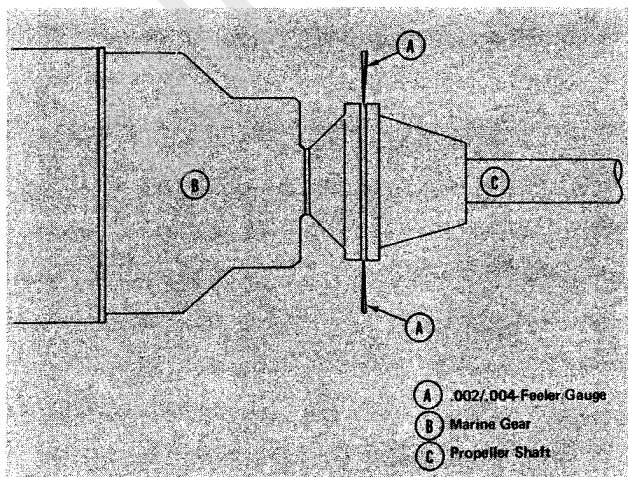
, (V21967). Checking alignment between marine gear and propeller shaft
